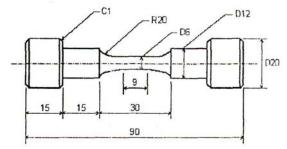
Low-cycle fatigue specimen geometry (dimensions in mm).
